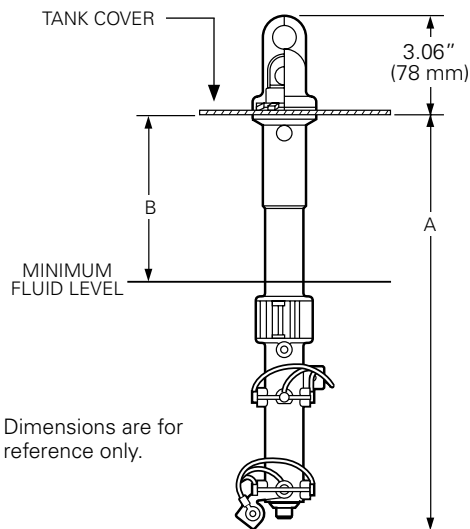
Cover-mounted assembly dimensions are fluid level (23 kV maximum line-line voltage).
